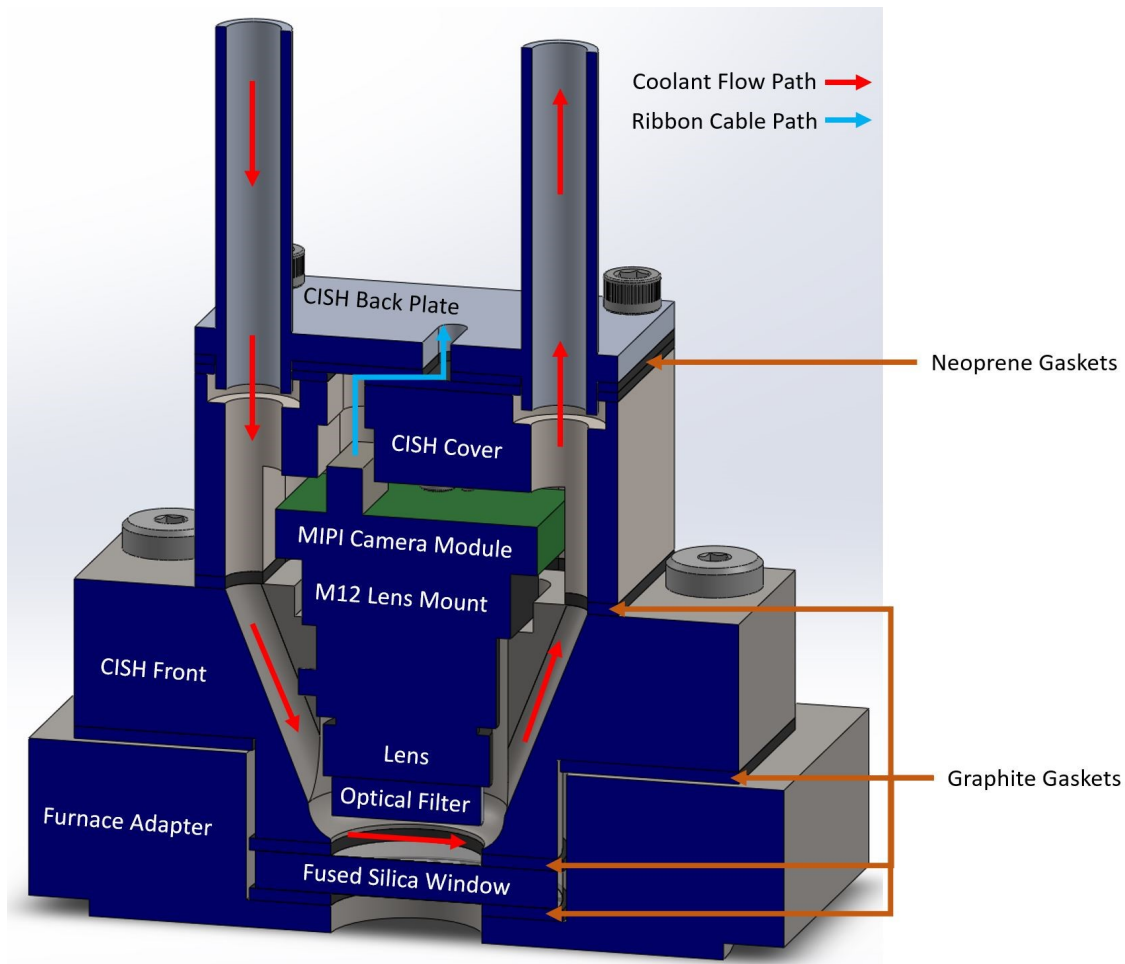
Cross-section of CISH assembly with camera module and optical filter installed
